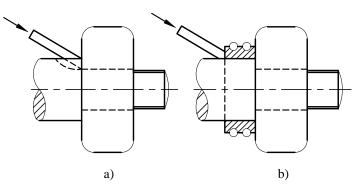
REMOVAL OF BEARING FROM SHAFT
